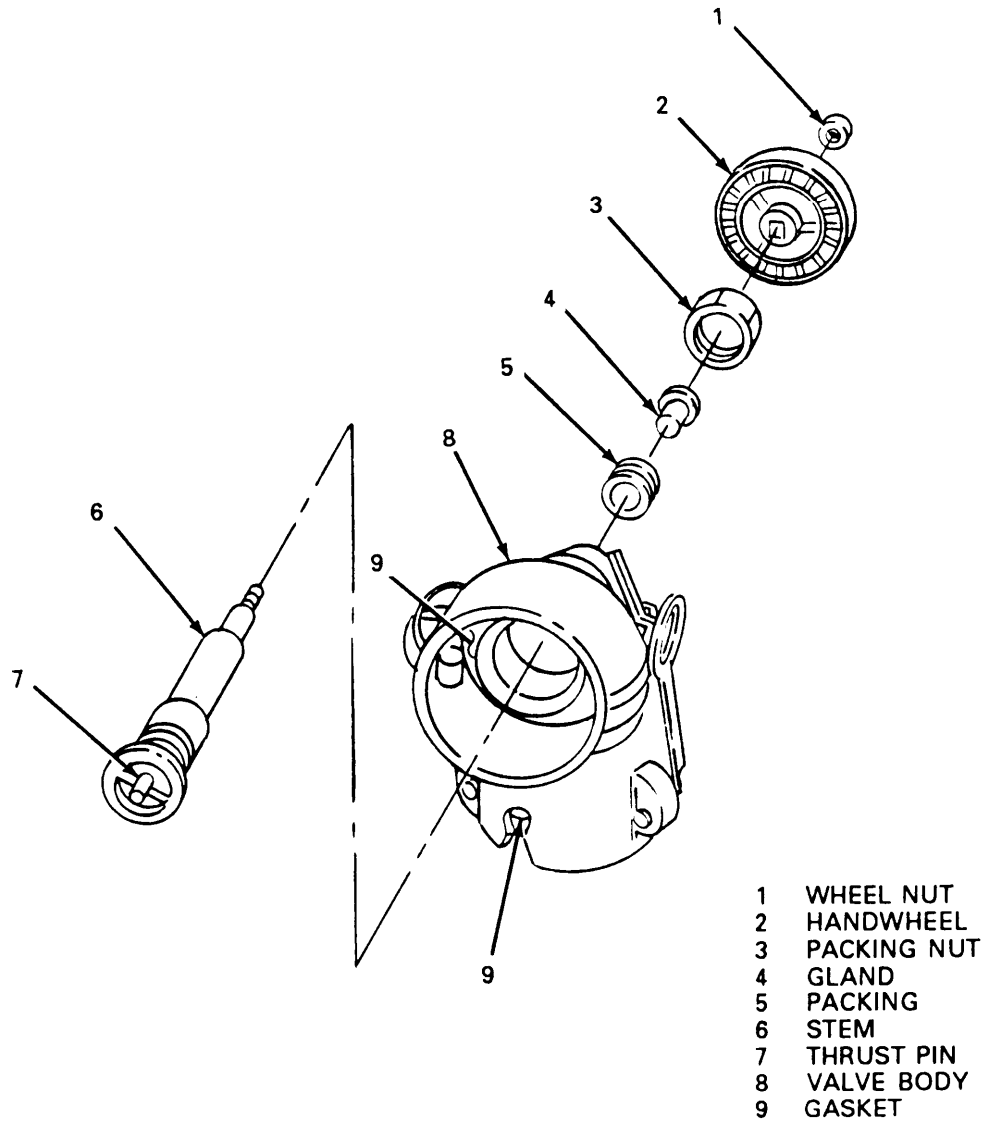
Elbow Coupler Valve, Disassembly/Assembly.
